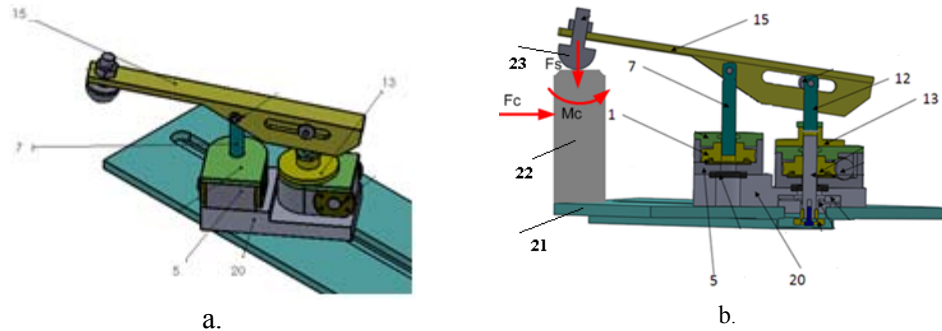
Analysed device: *a* - Perspecting view of the device, *b* - Section view of the device.
